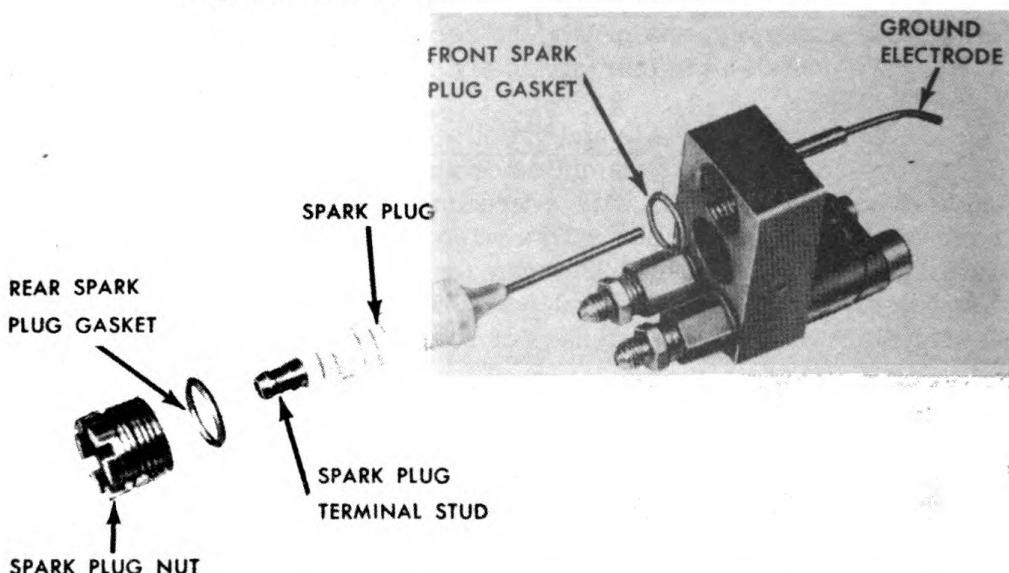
Exploded view showing spark plug, spark plug nut, and ground electrode.
